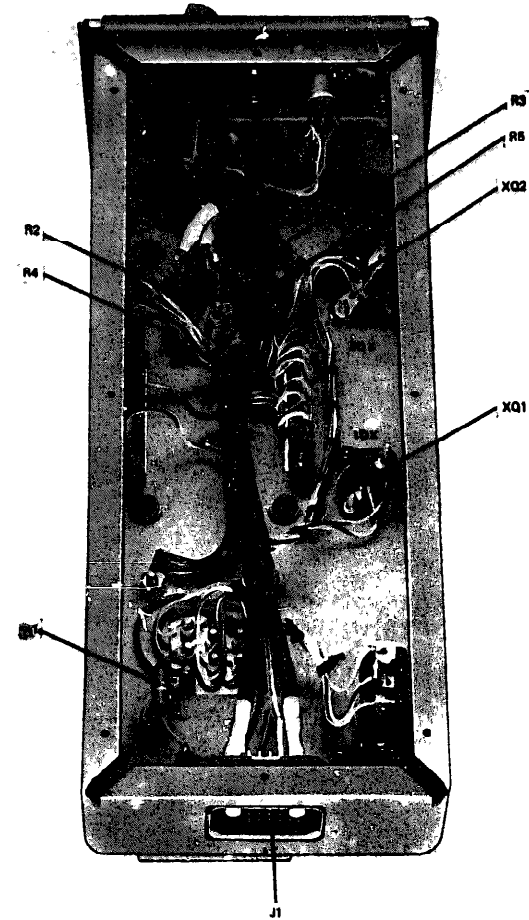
645C VSWR alarm power supply assembly A2, wiring diagram and parts location
